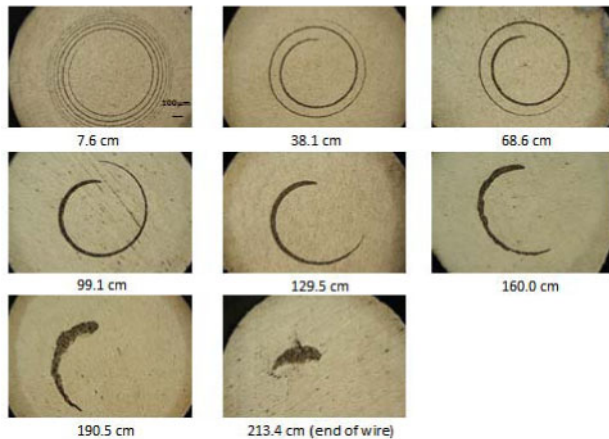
Cross sections of flat die wire made by Supermill machine from 7.6cm to 213.4cm to the beginning of wire (cm)
